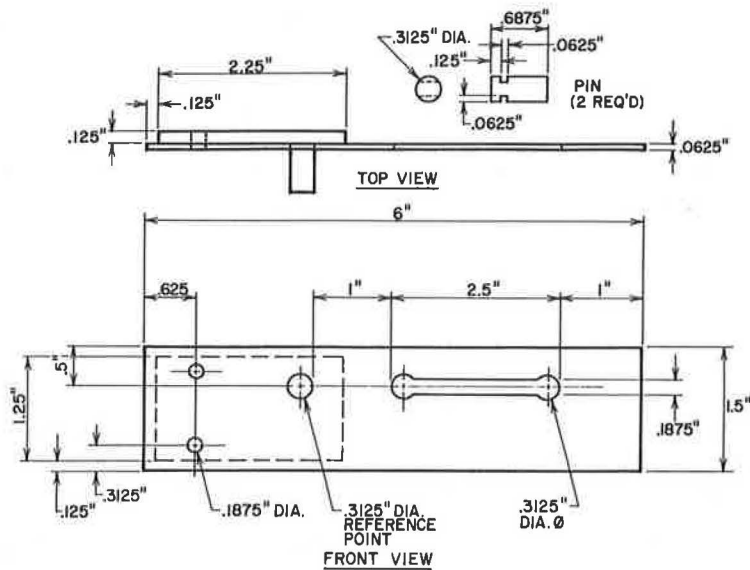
Engineering drawing of the base plate of the crack monitor gauge.
